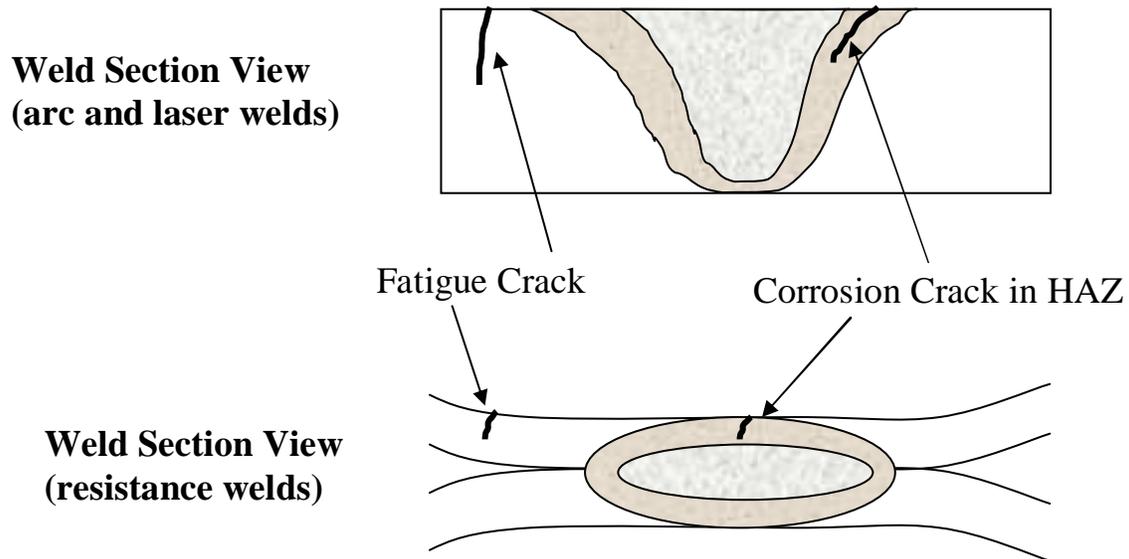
Schematic showing locations of fatigue and corrosion crack in and near the welds.
